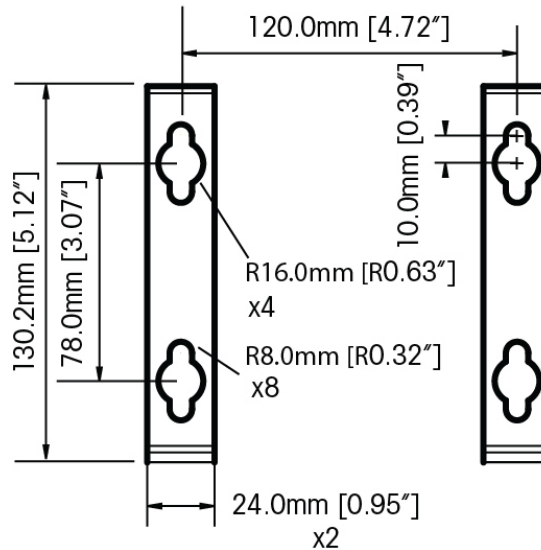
Original Wall Bracket Mounting Hole Pattern (In IND570 terminals manufactured up to April, 2016)
